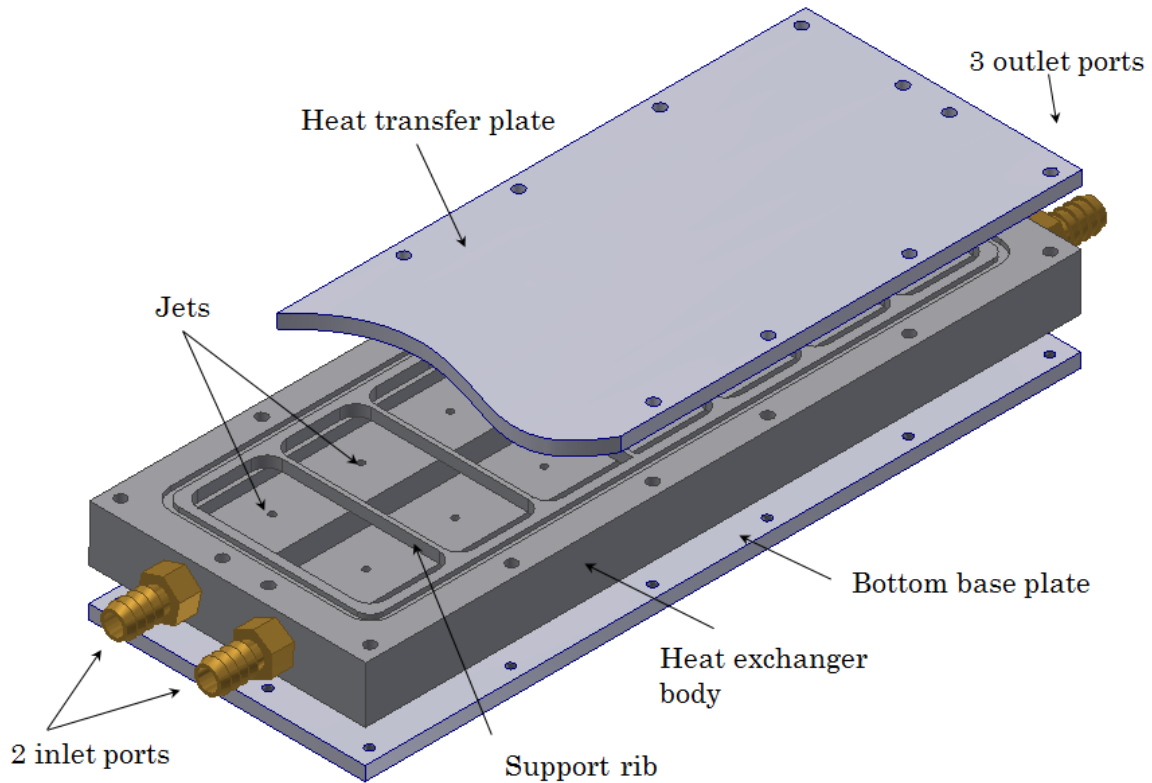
A 3D CAD model showing the design of the impinging jets heat exchanger.
